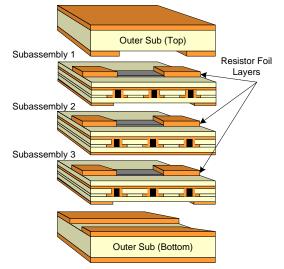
Stack up of multilayer PCB with subassemblies and multiple embedded resistor layers
